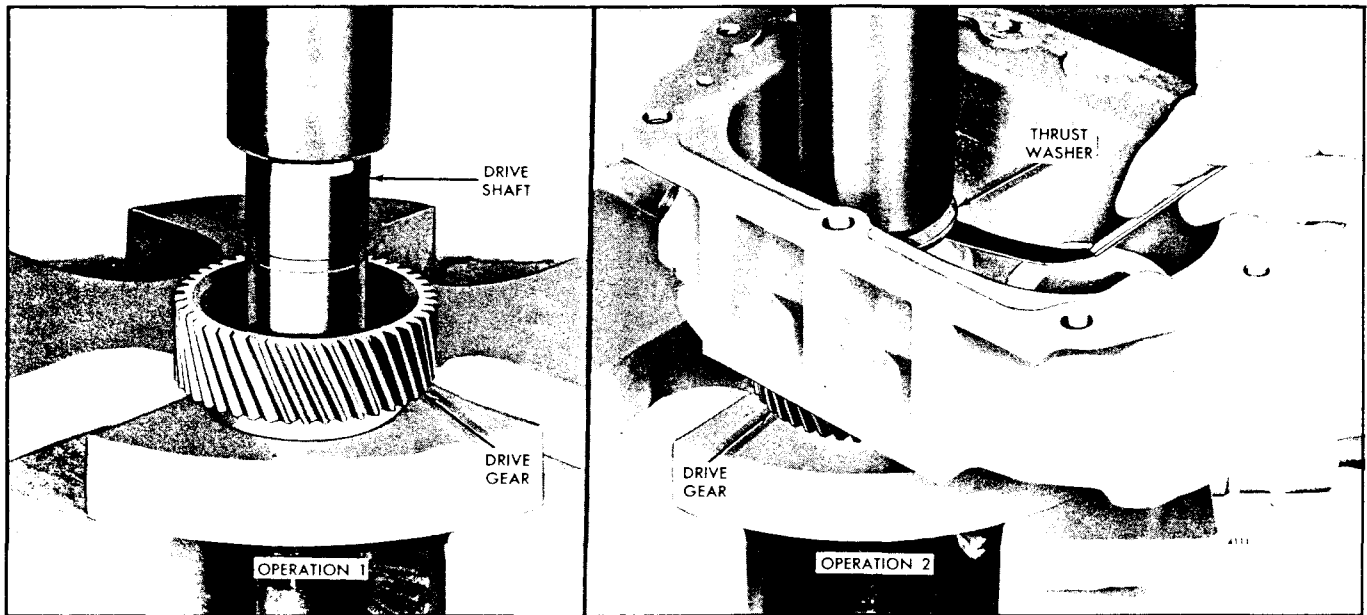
Installing Blower Drive Gear Shaft in Drive Gear
